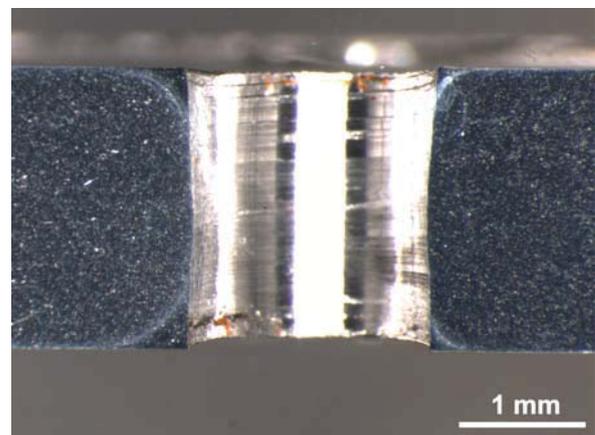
Cross-section view of hole drilled with Drill D, resulting in burr free edges ($v_c = 226 \text{ m} \cdot \text{min}^{-1}$, $f = 0.190 \text{ mm}$, setting D1).
